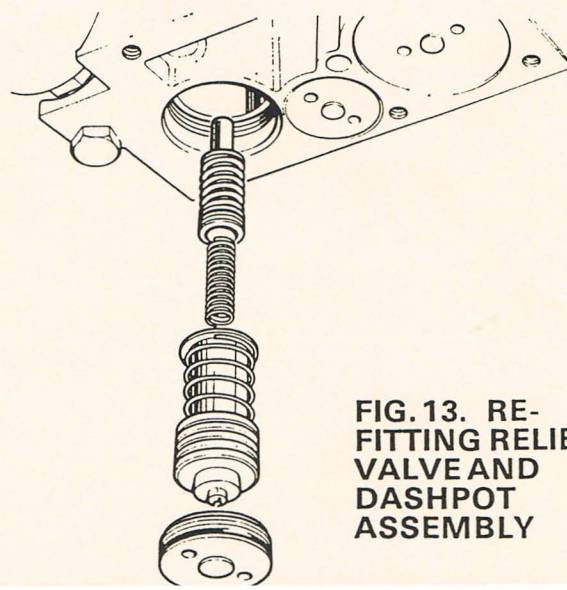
RE-FITTING RELIEF VALVE AND DASHPOT ASSEMBLY
